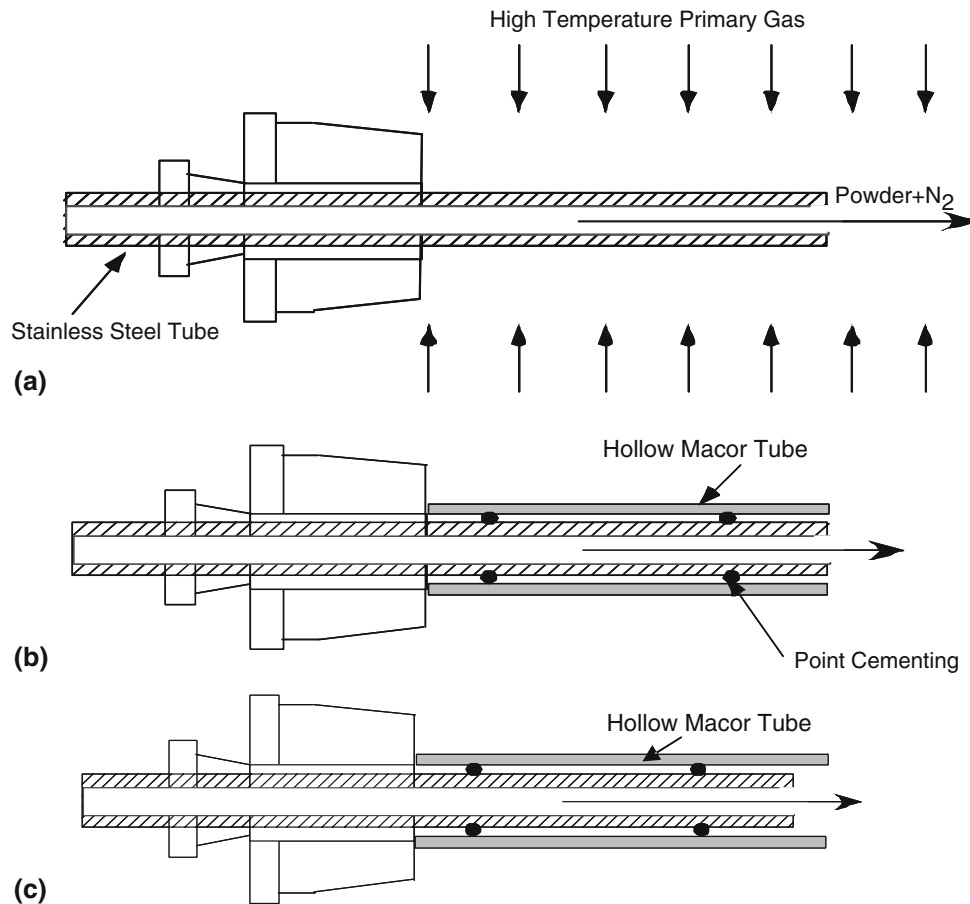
Several injection configurations examined in this study: (a) An injector made of bare stainless steel tube without insulation, (b) An injector in which the stainless steel tube is encapsulated with a hollow Macor tube, and (c) A recessed injector configuration
